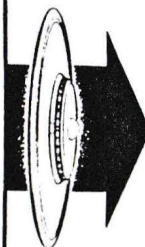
TURBINE-COMPRESSOR ASSEMBLY
